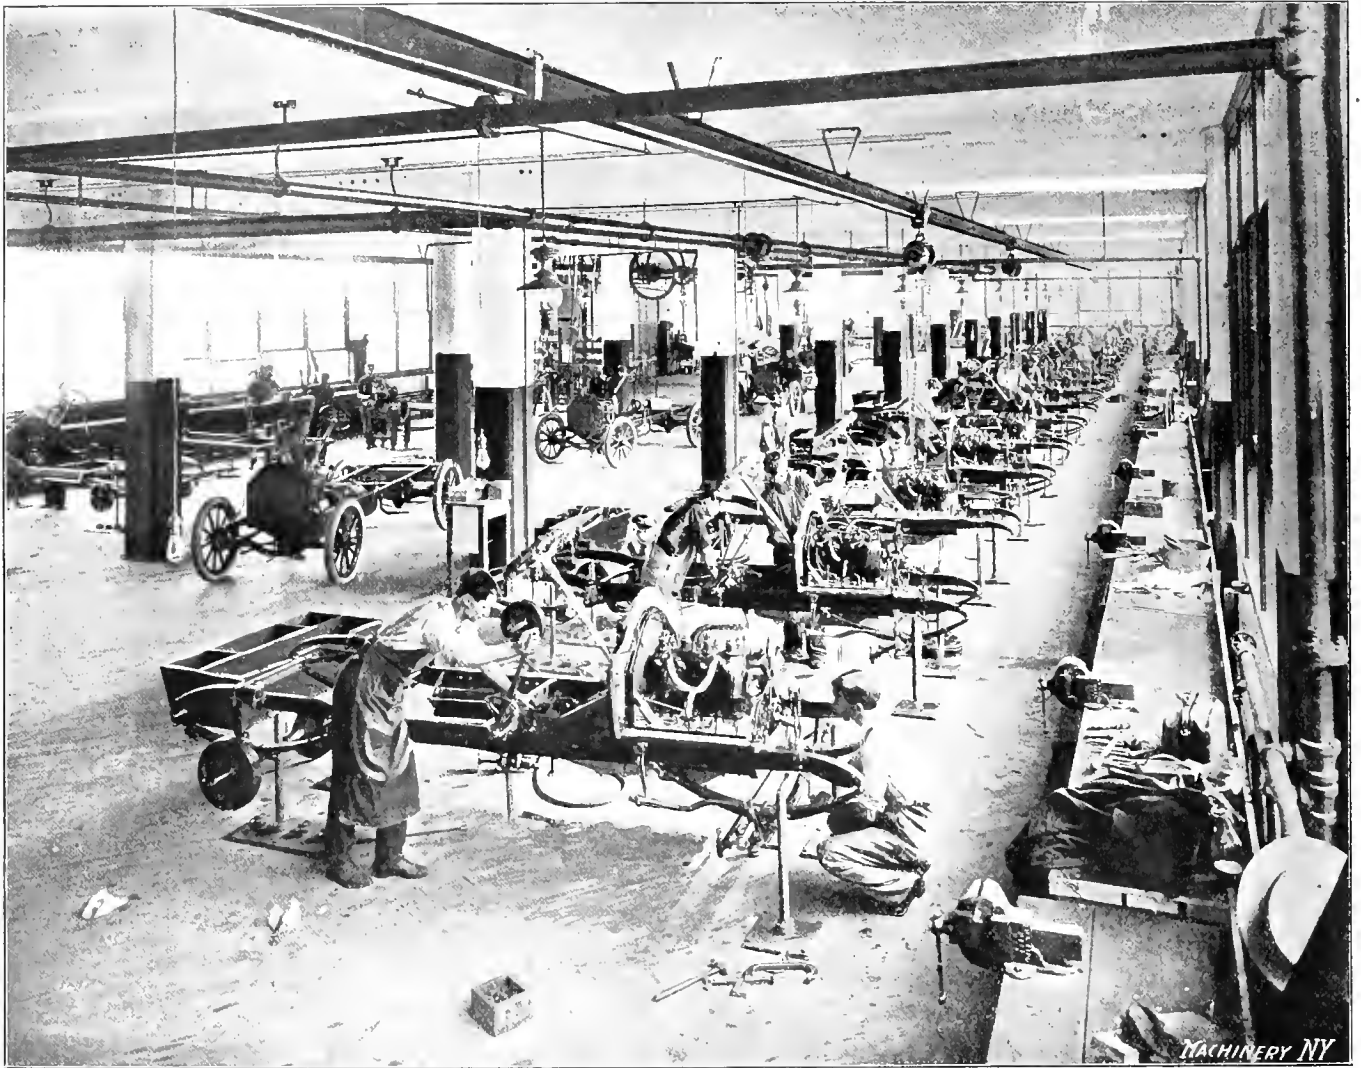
View of the Assembling Room, showing Arrangement of Overhead Track and Differential Hoists; the Trucks, each of which holds the Parts for Two Cars, and the Adjustable Frame Supports
